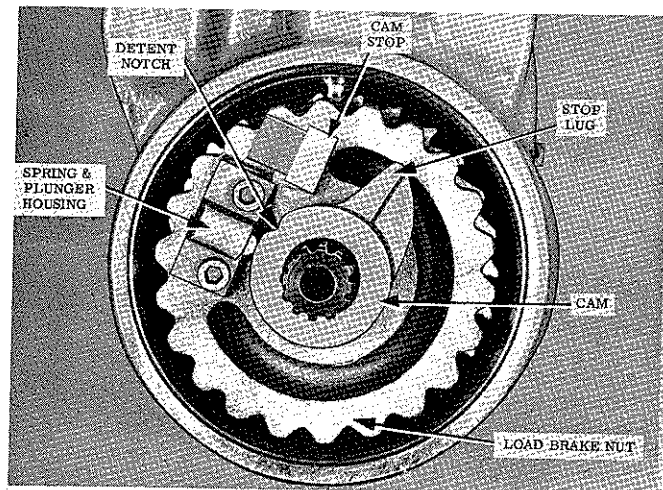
Assembled View Showing Correct Position for Free-Wheel Cam
